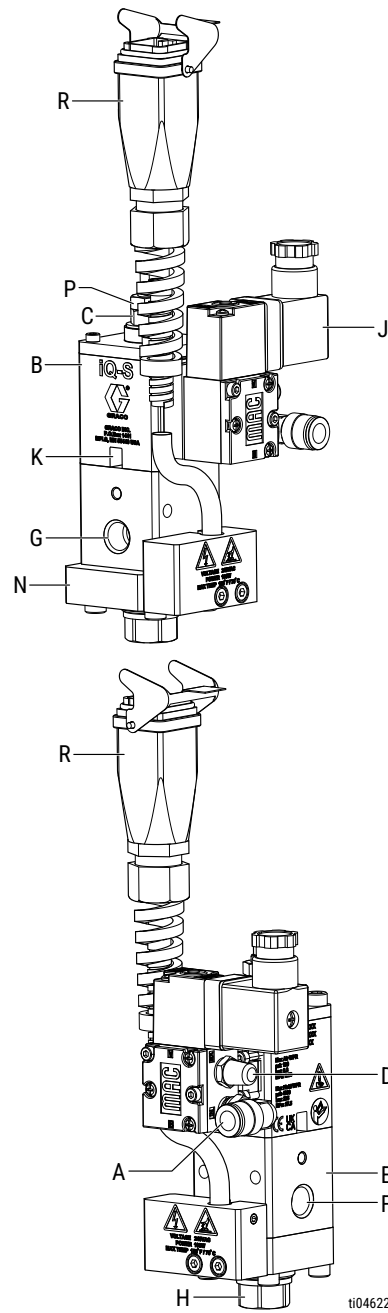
Snuff Back, Heated Valve Mounted Solenoid 2011299 Valves
